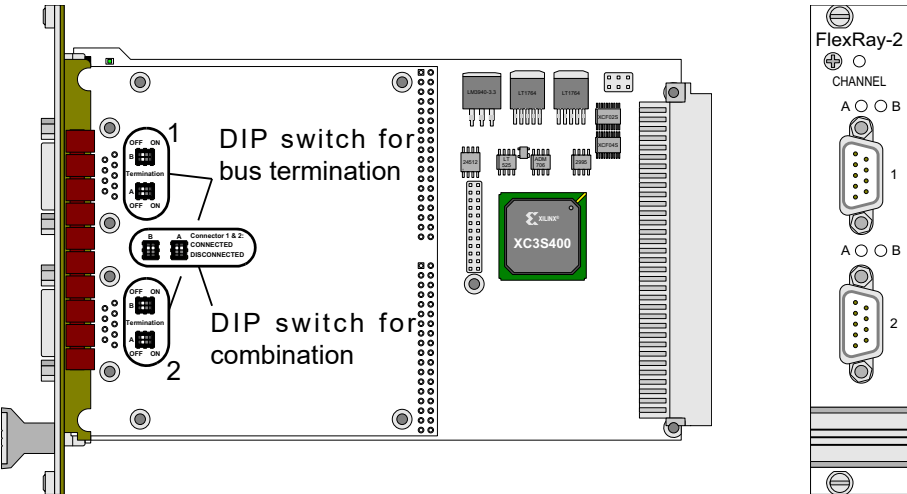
Pro II-FlexRay-2 Rev. E: PCB and front panel
